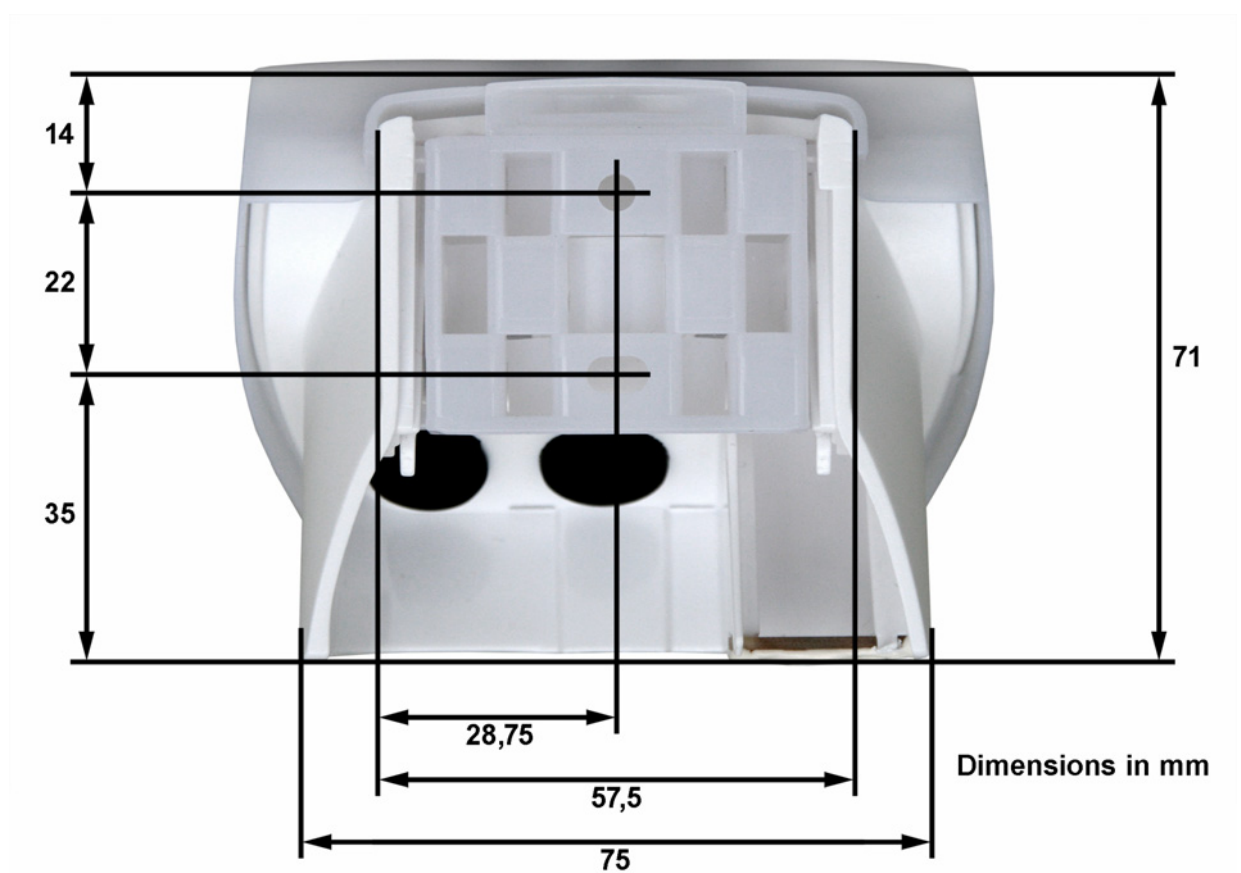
Dimensions of rear side of housing with bracket. Subject to change for technical enhancement
